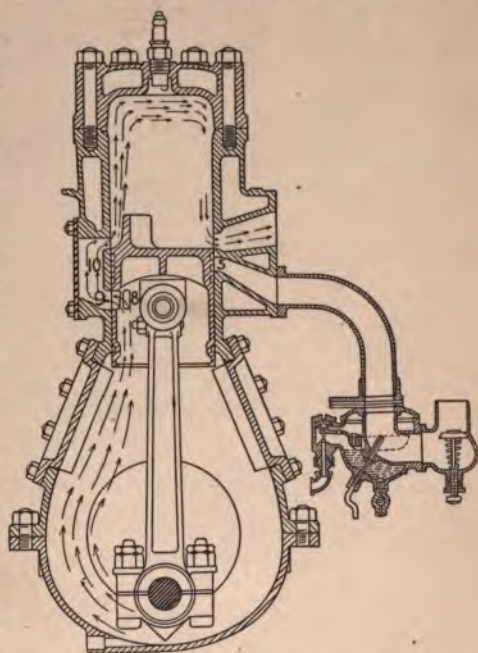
End of explosion stroke on 2-cycle, 3-port engine, showing the exhaust and inlet ports open
